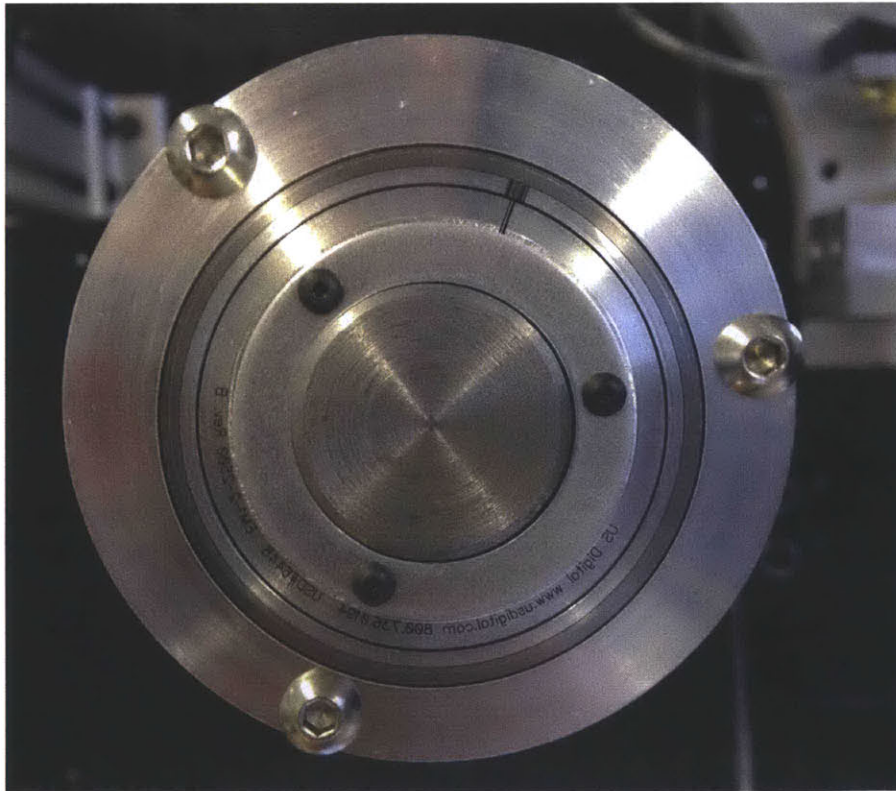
The rotary optical encoder disk mounted on the custom machined idler roll faceplate standoff. The encoder read-head (not pictured) gives 2500 counts of quadrature per rotation of the idler roll.
